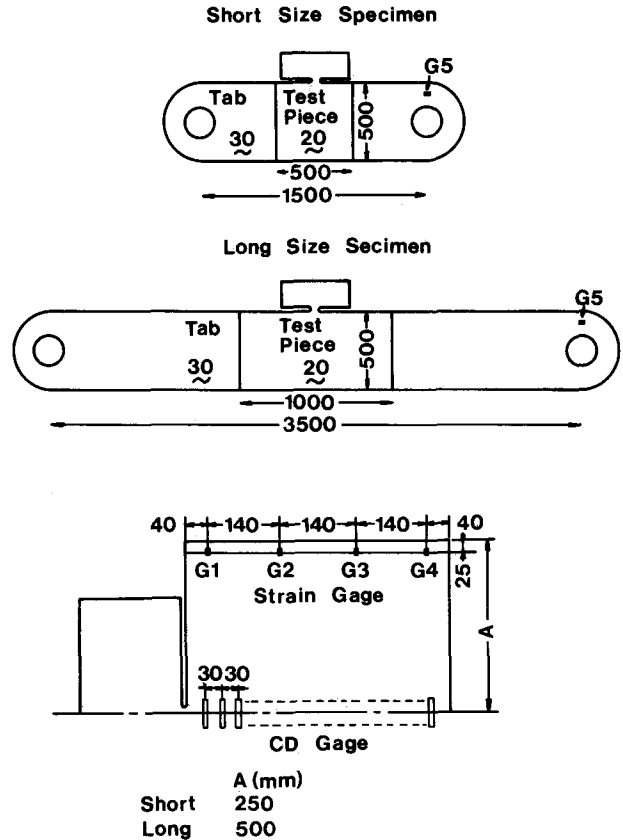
Specimen configuration and arrangement of crack-detector gages and strain gages
